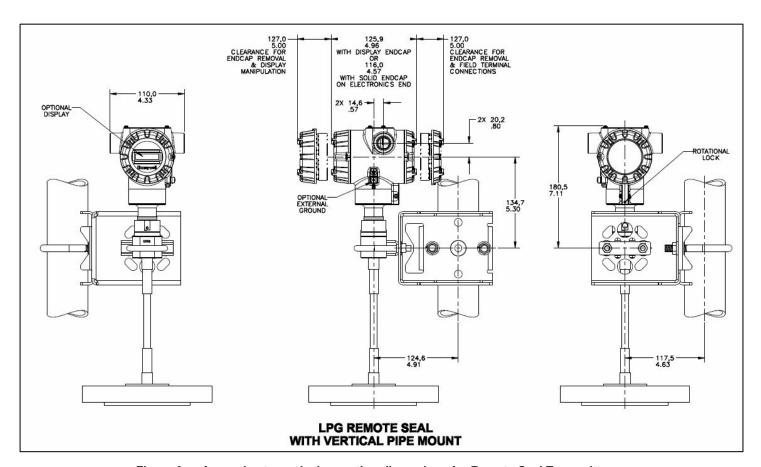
Approximate vertical mounting dimensions for Remote Seal Transmitter
